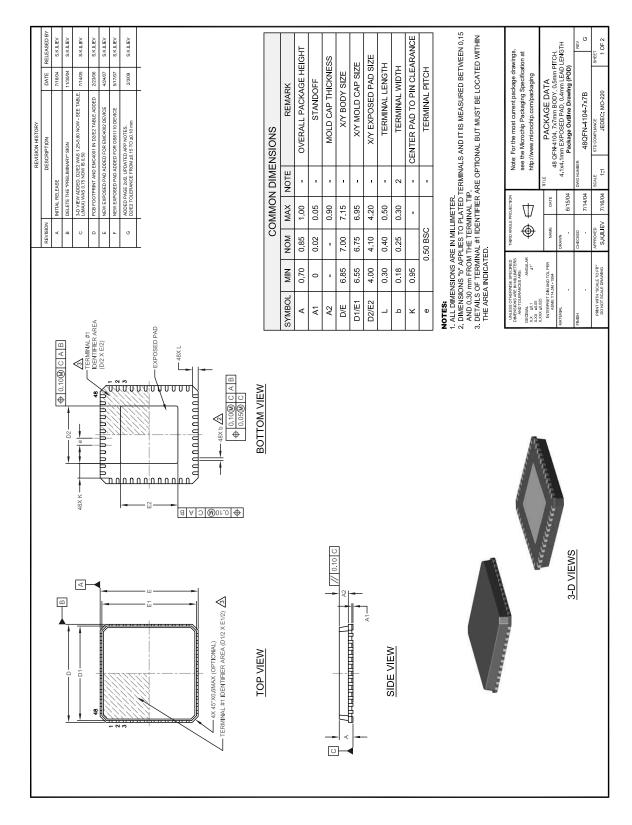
PACKAGE OUTLINE: 48-PIN QFN, 7X7 MM BODY (1 OF 2)
